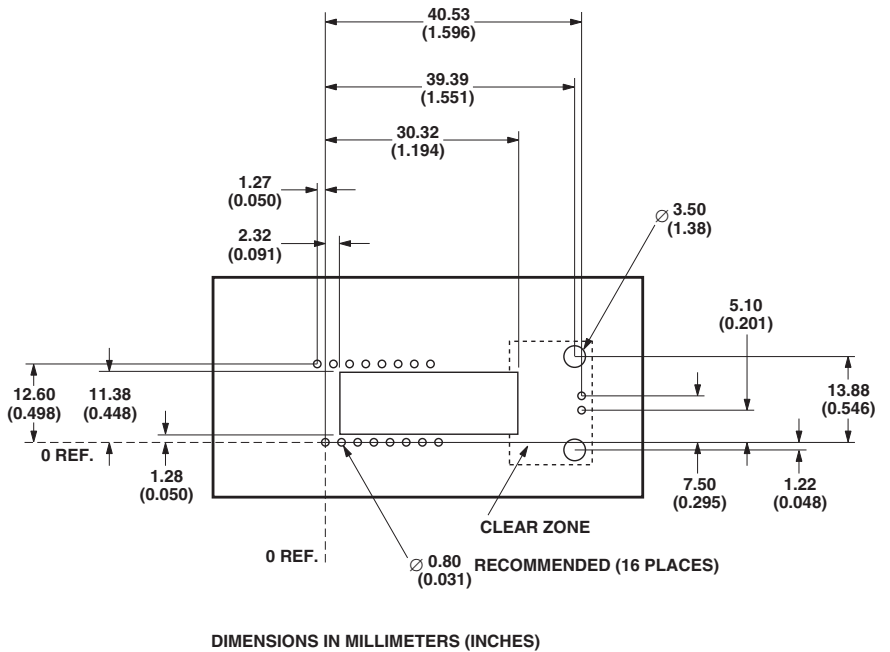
Recommended PCB mechanical cutouts and spacing (top view)
